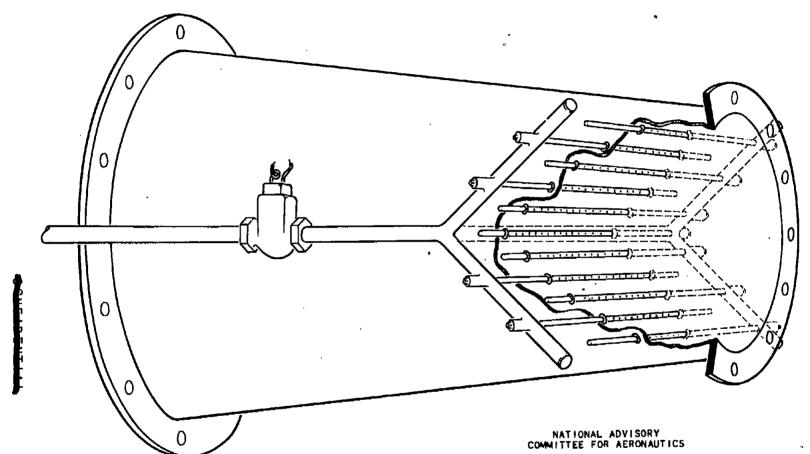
Installation of four-tube and seven-tube fuel injectors in diffuser of 20-inch ram jet.
